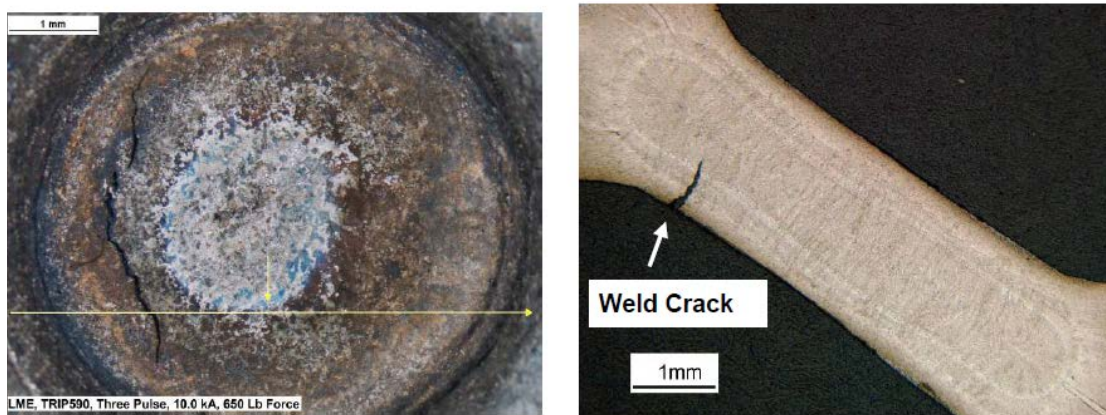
Weld crack in Zn coated TRIP590 steel [SIG 08]
